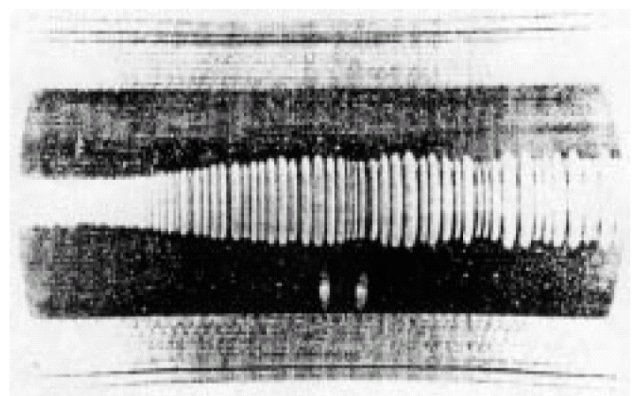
Surface roughness of a ball bearing race due to electrical fluting
